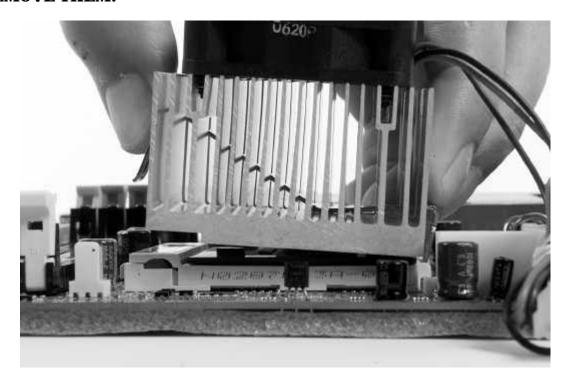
Side View of Heatsink and Clip on an Socket A AMD Processor
